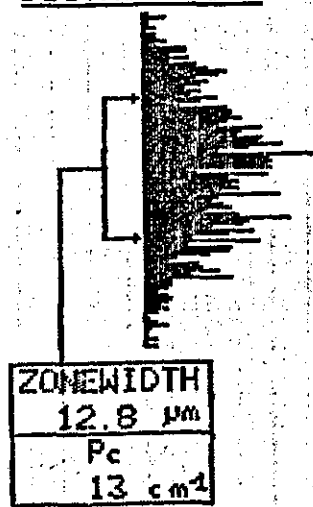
(11) SURFACE FINISH MEASUREMENTS SPIDER FORGING DIE CASTING 8
